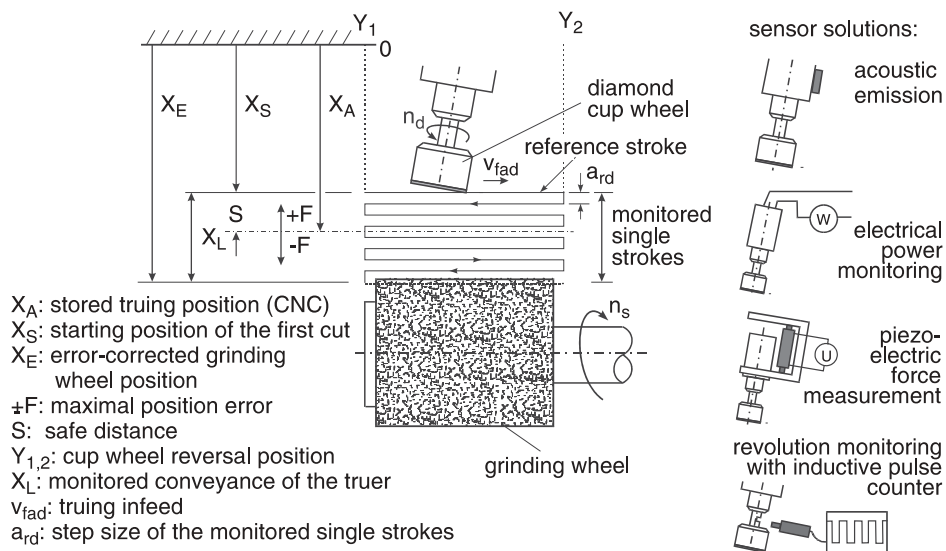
Dressing monitoring with rotating diamond tools. Source: Heuer [33]
